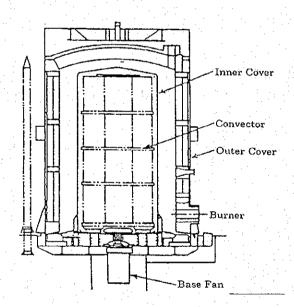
Schematic Drawing of Box Annealing Furnace
